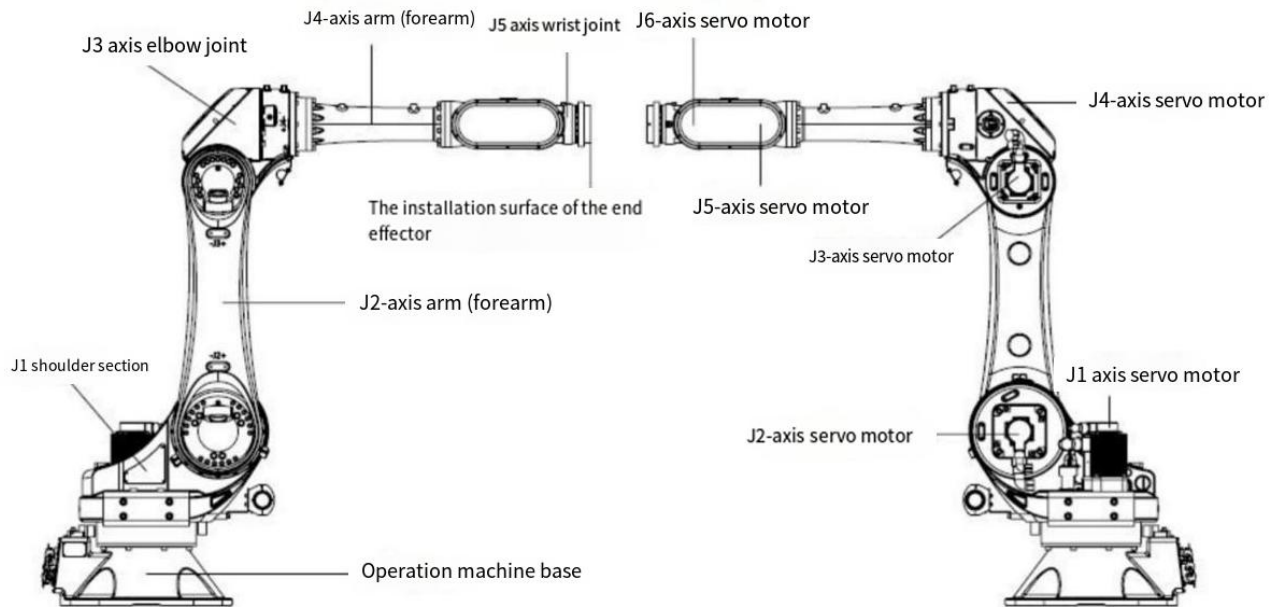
Robot body and its components of RX3-A650-2260/RX3-A680-2260
